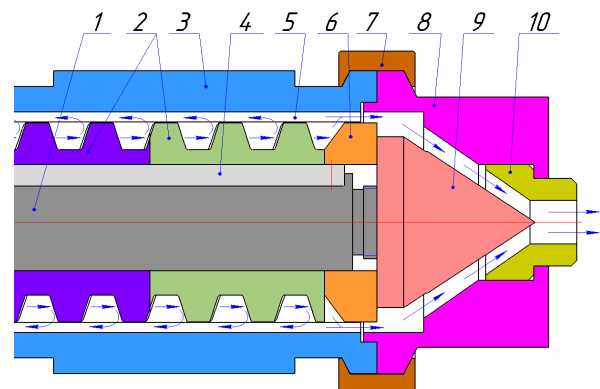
Feed movement process in the pe-150 press extruder: 1 – screw shaft, 2 – feeding screw, 3 – housing, 4 – key, 5 – horizontal grooves in the housing, 6 – compression gate, 7 – coupling, 8 – die head, 9 – conical tip of the shaft, 10 – die plate.
